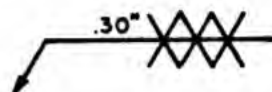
Spot welding symbol showing use of combined dimension
